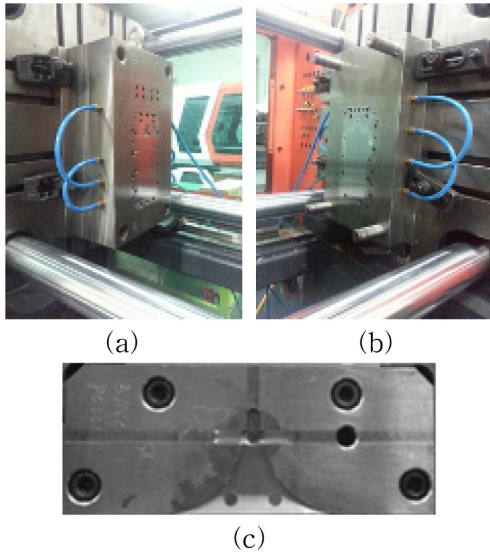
Pictures of 8 inch LGP mold (a) moving part; (b) fixed part; (c) fan gate.
